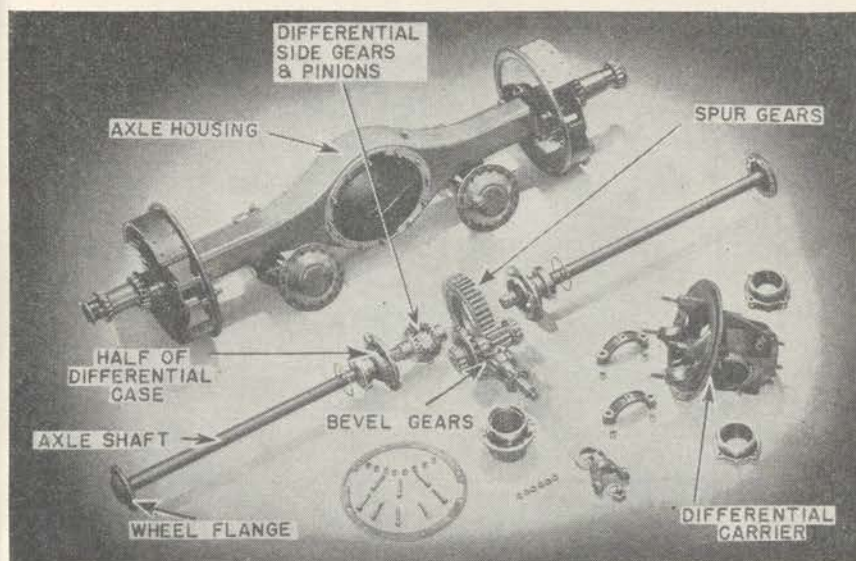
Arrangement of gears in double reduction rear axle.
